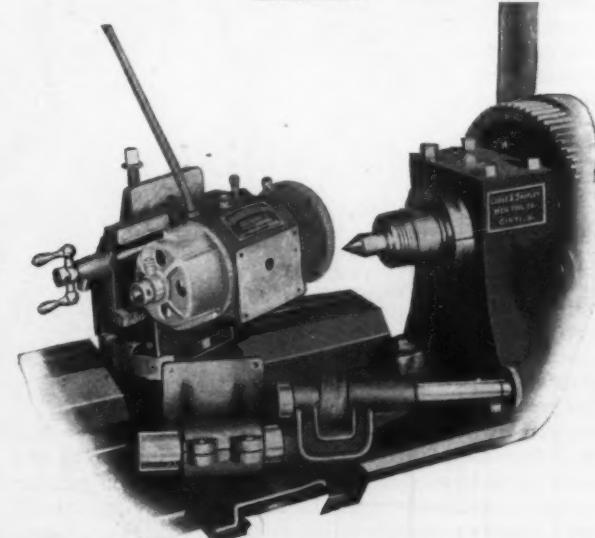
The Attachment Removed and Machine Used as a Center Grinder.
